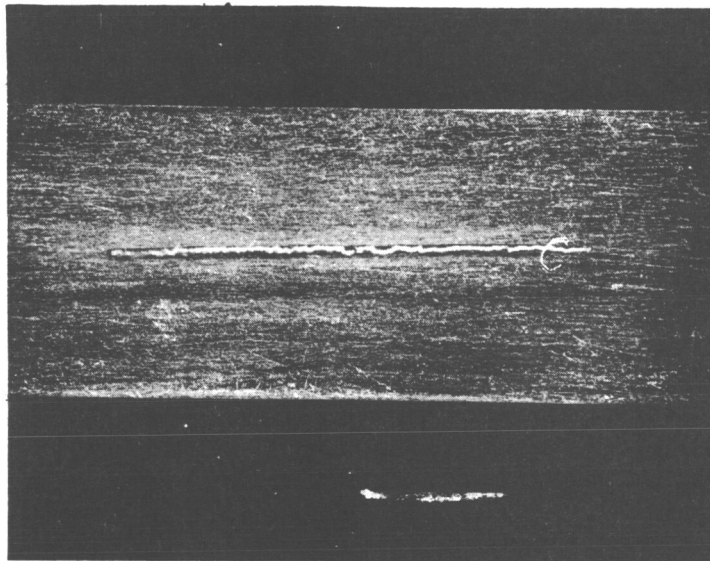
Seam weld on surface of 2014 Aluminum. Weld schedule: 1.99 volts, 20 lbs. pressure, 30 inches/minute speed. 1.4X
